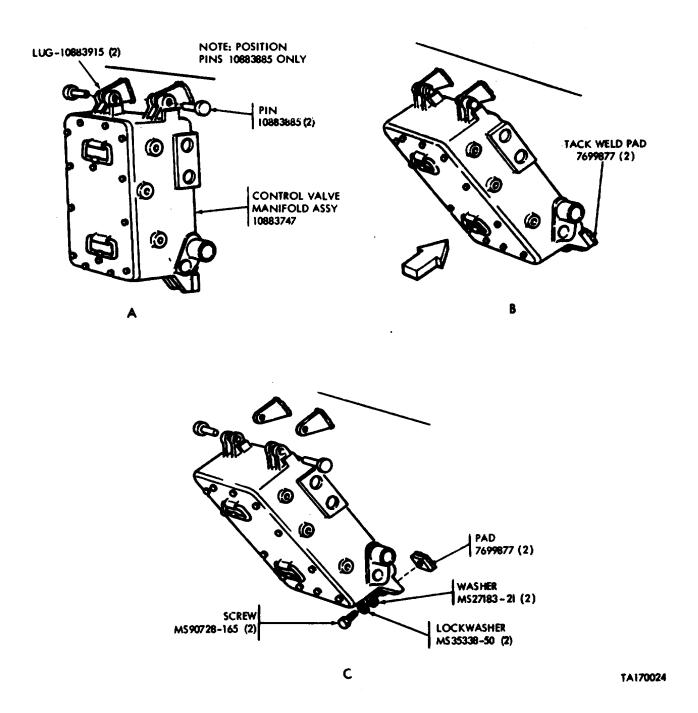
Installation of manifold assembly (sheet 1 of 2).
